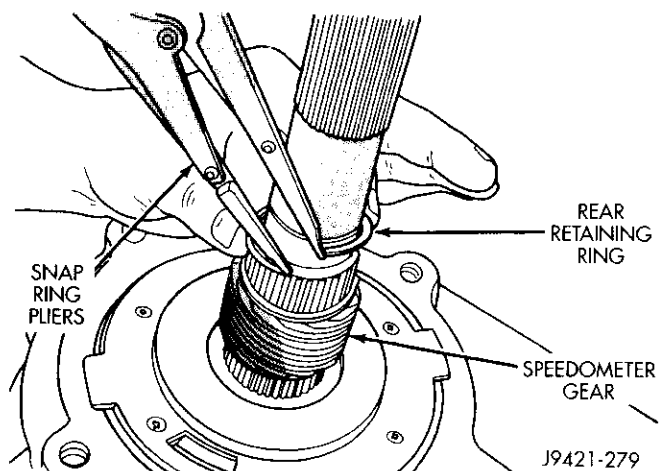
Removing Speedometer Gear Rear Retaining Ring
